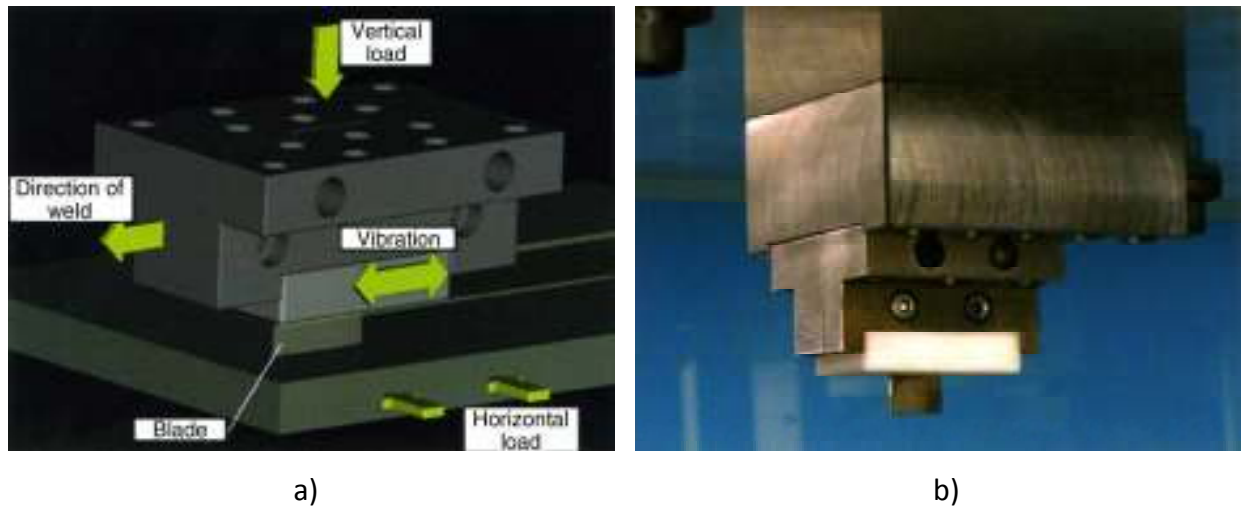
Viblade welding process. a) Schematic outline of the Viblade process b) Viblade machine[22]
